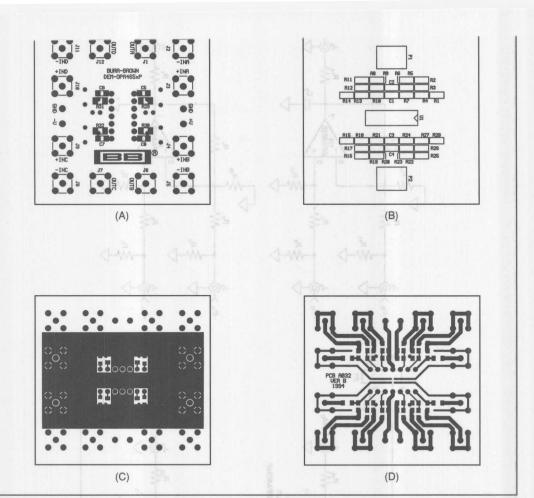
Board Silkscreen (Bottom). 12b. Board Silkscreen (Top). 12c. Board Layout (Solder Side). 12d. Board Layout (Component Side).
